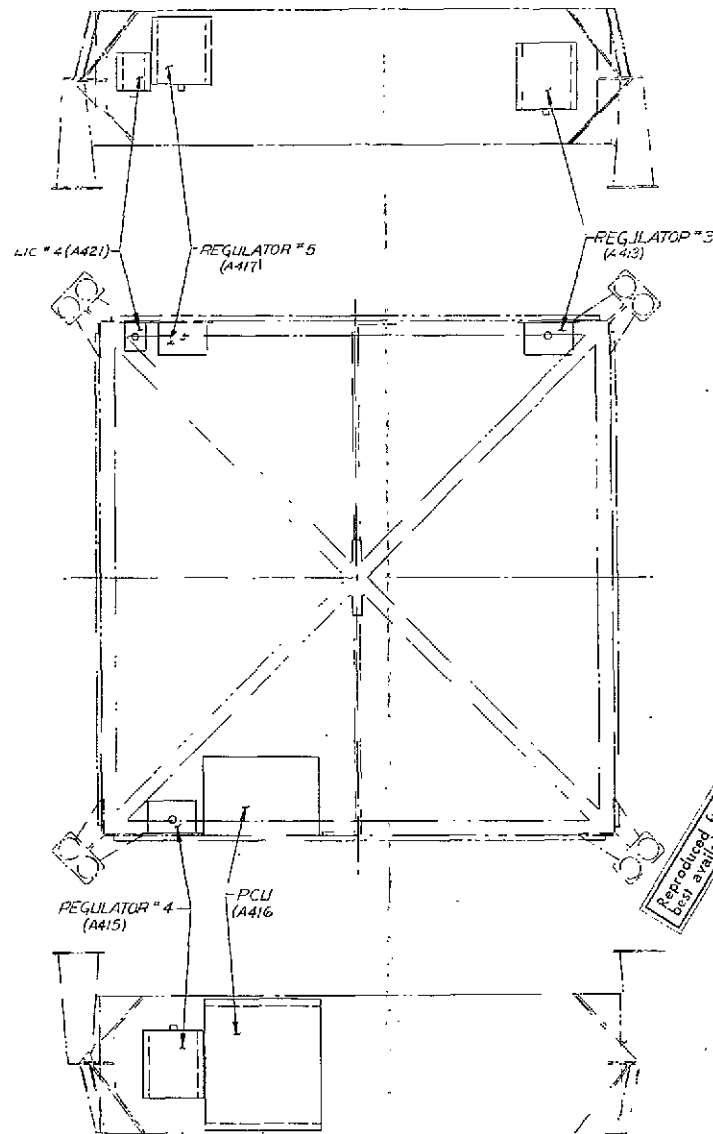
ATS F&G Power Subsystem Installation Design Layout (Sheet 1 of 2)
